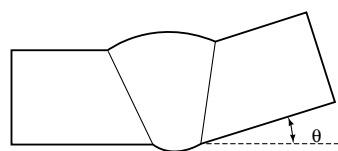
Distortion caused by welding two plates that were originally flat
